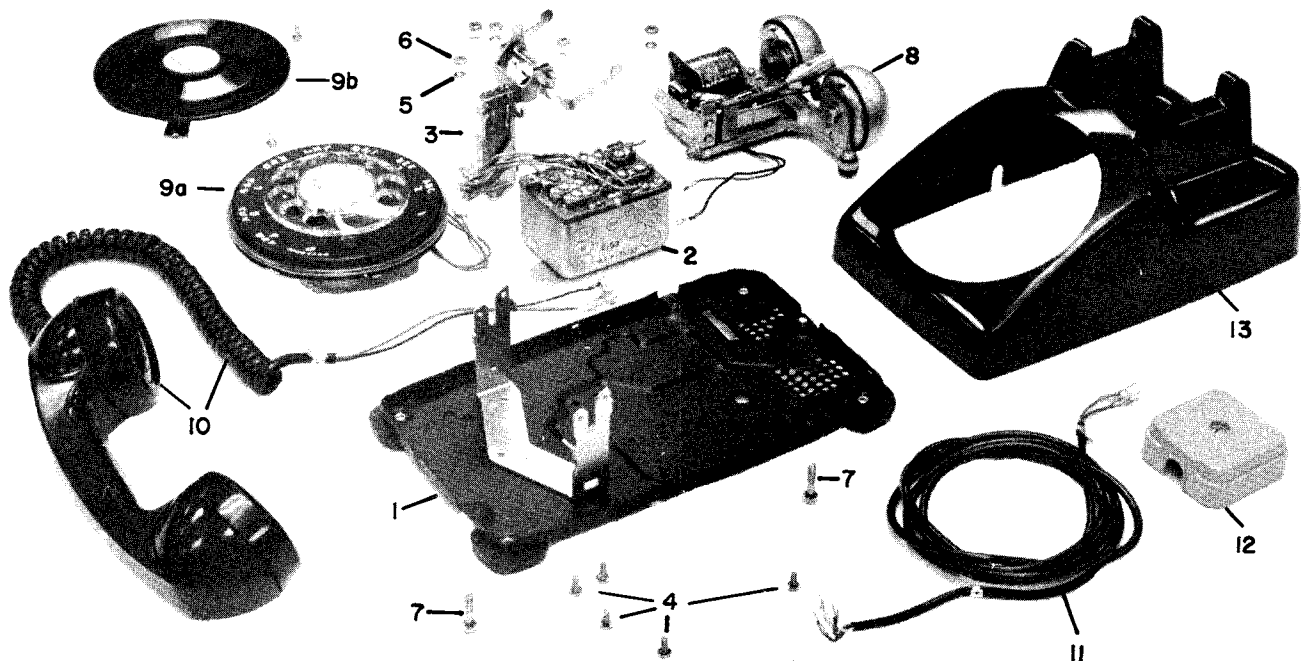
COMPONENT PARTS - EXPLODED VIEW
